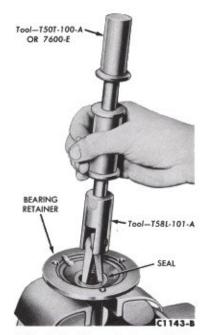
Removing Input Shaft Bearing Retainer Seal
